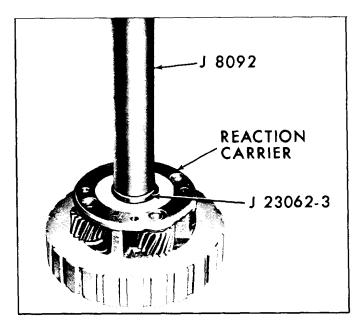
G-121 Removing or Installing Reaction Carrier Bushing
